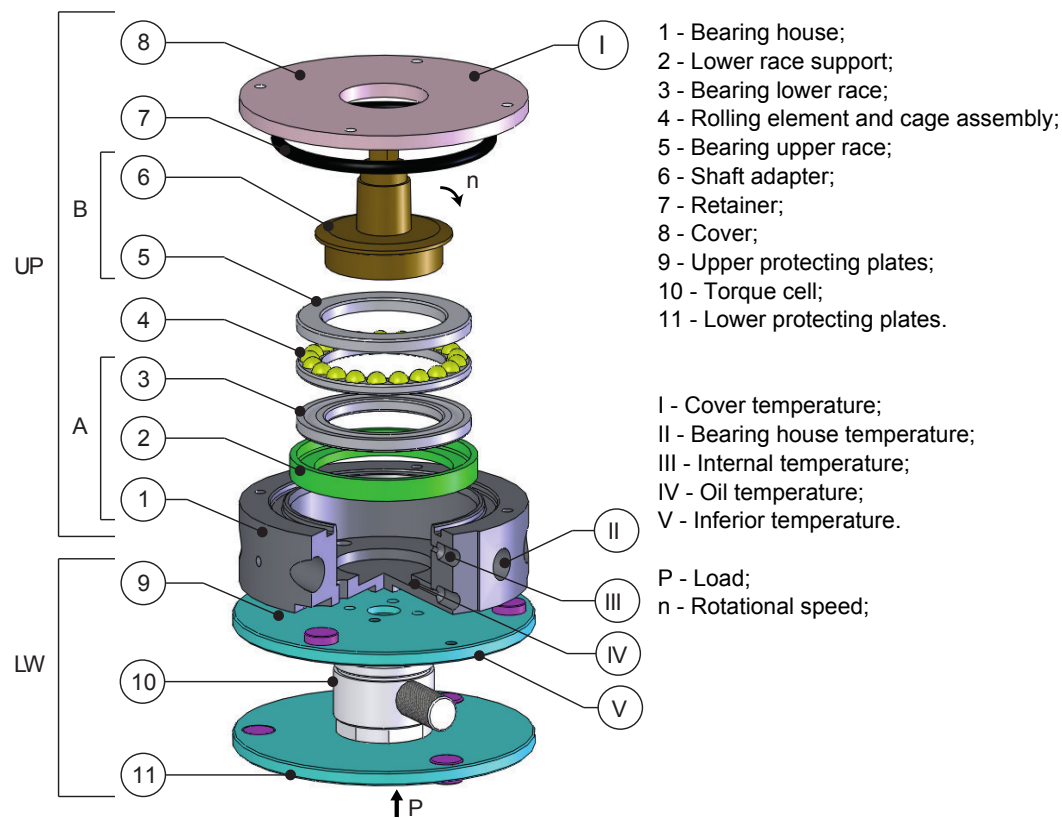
Rolling bearing assembly. Note: Numbers from 1 to 11 are related to the assembly components, while numbers from I to V are referred to the thermocouples locations.
